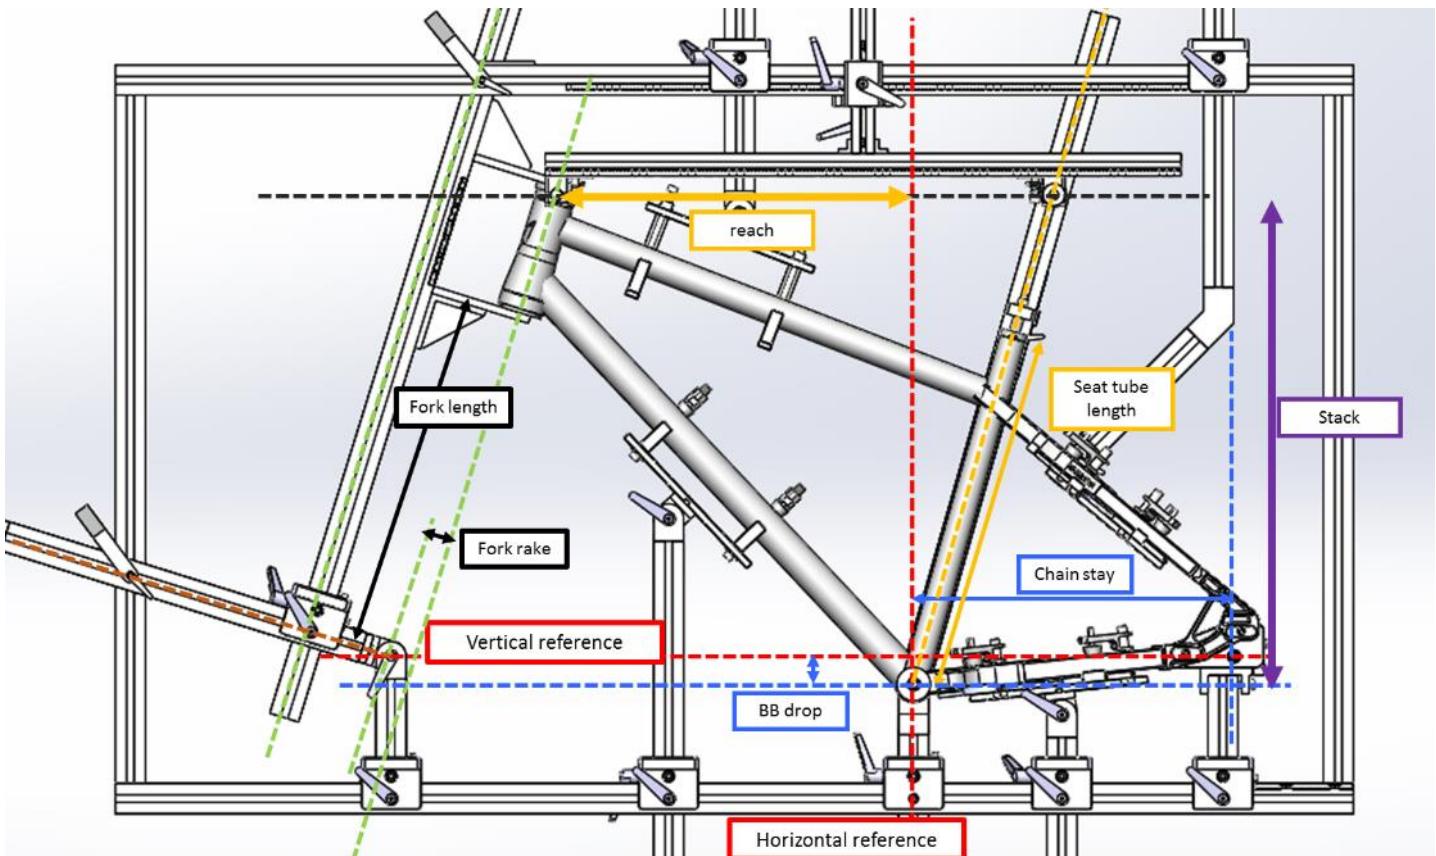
Details of geometrical parameters on new welding-jig design
